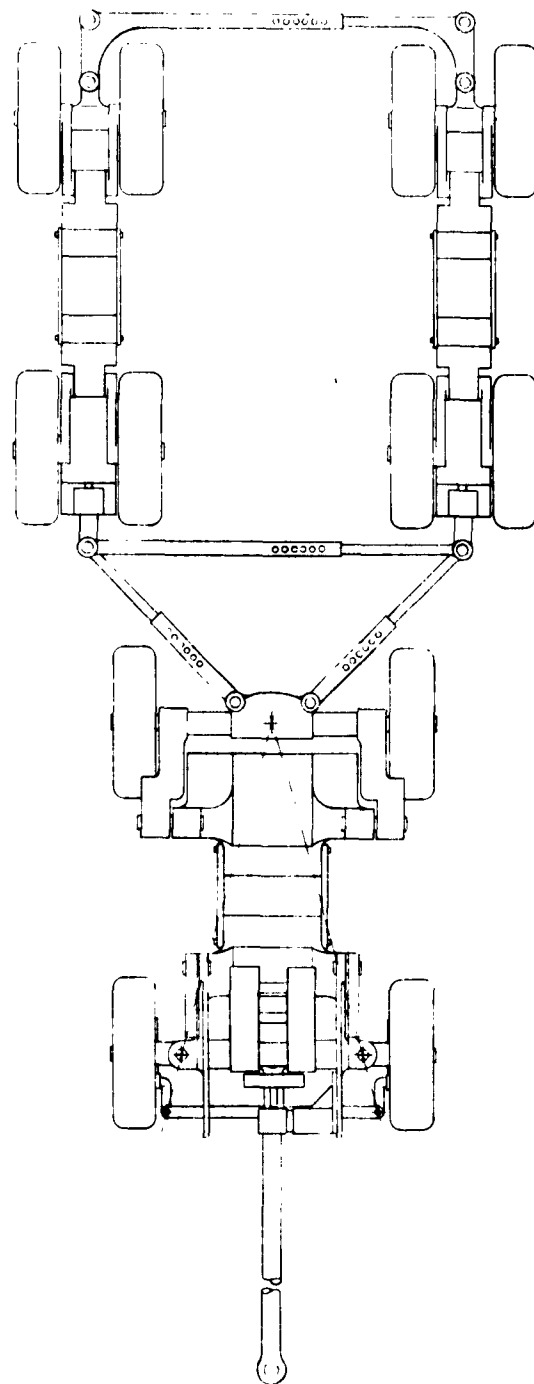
PLATON FOLIO IN SECTION FOR TOWING
